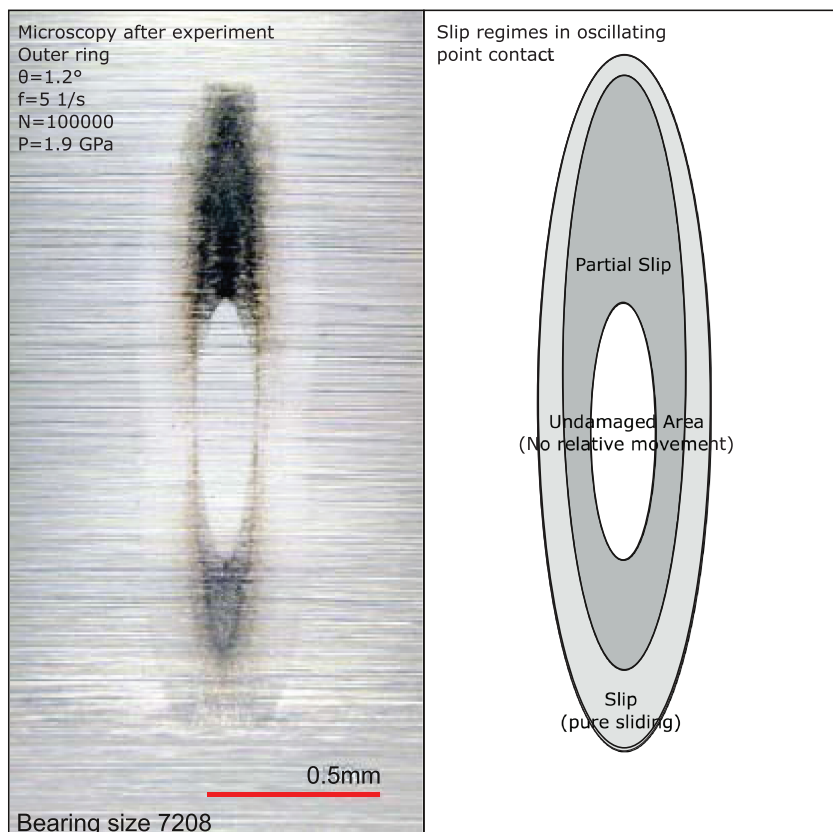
Wear under scaled rotor blade bearing conditions [Colour figure can be viewed at [wileyonlinelibrary.com](http://wileyonlinelibrary.com)]
